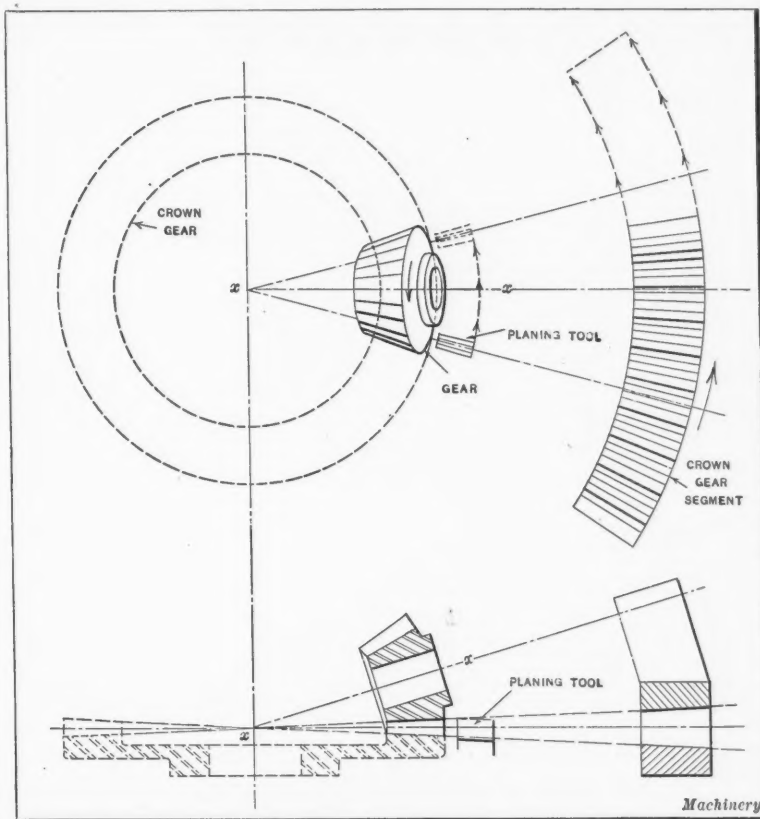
Diagram representing Action when Generating Motion is applied to Both Gear and Tool
